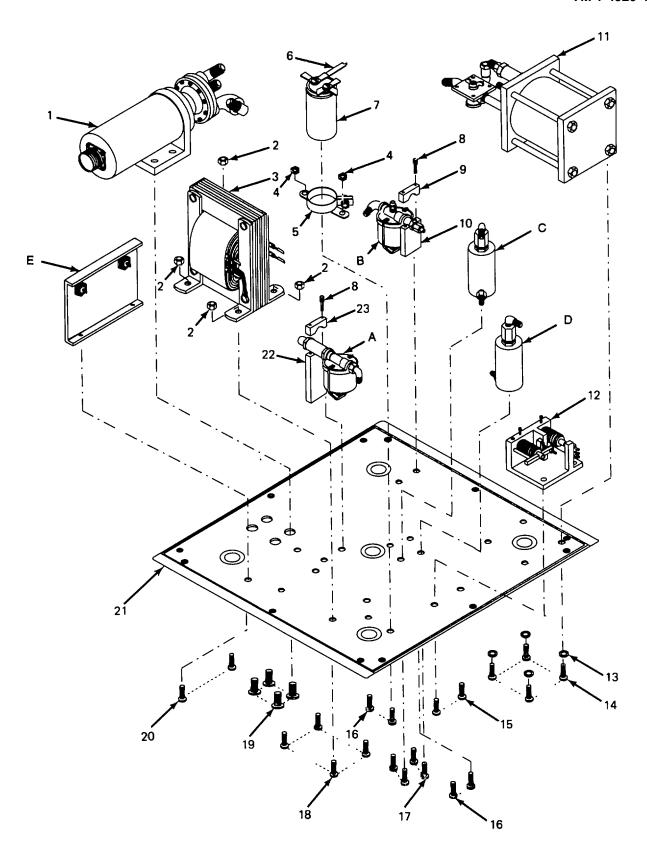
BOTTOM PLATE ASSEMBLY (91-10004) (SHEET 1 OF 4)
